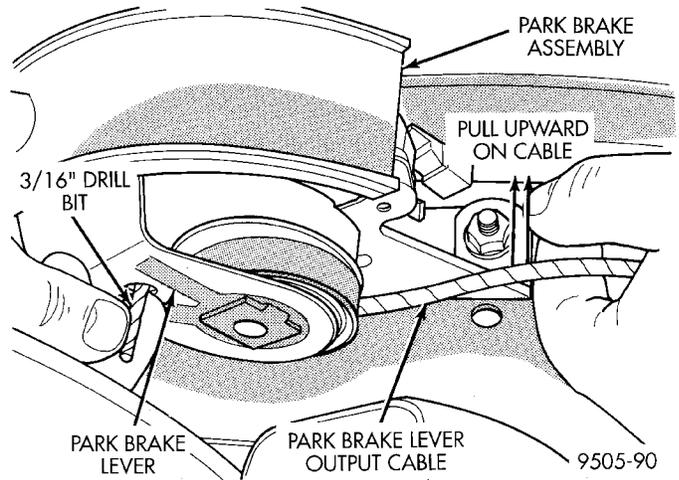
Locking Pin Installed In Park Brake Mechanism
